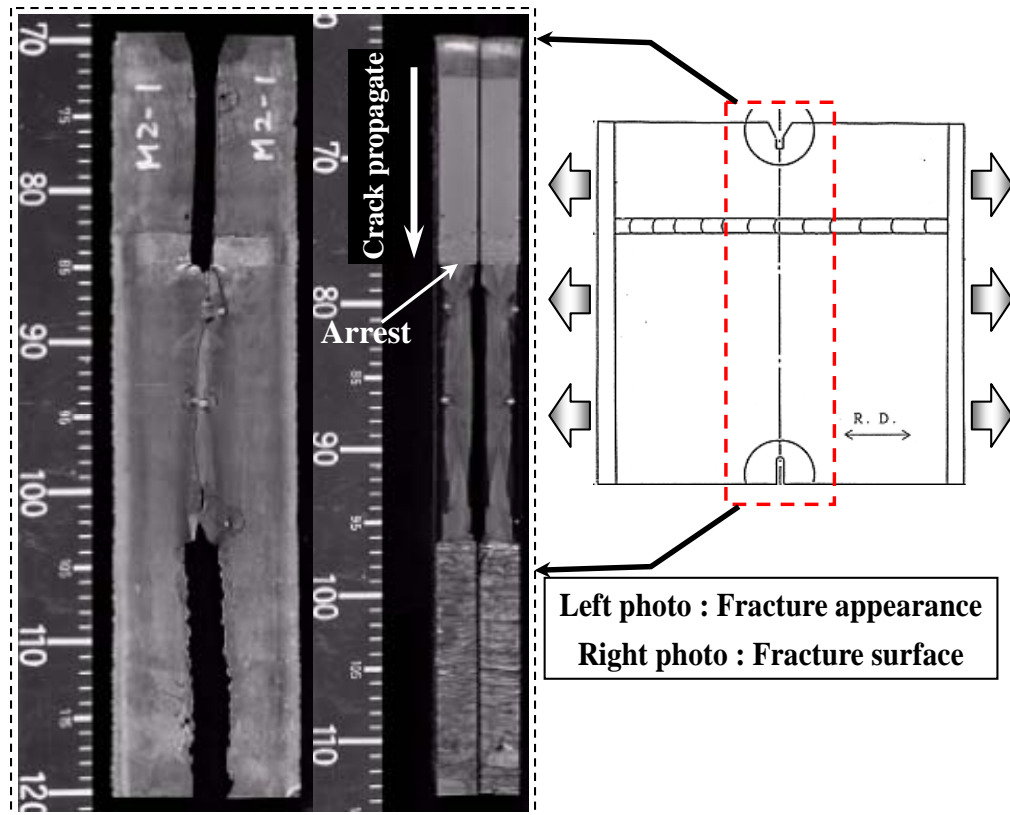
Example of fracture surface of duplex ESSO test (25mmt, -196deg.C)
